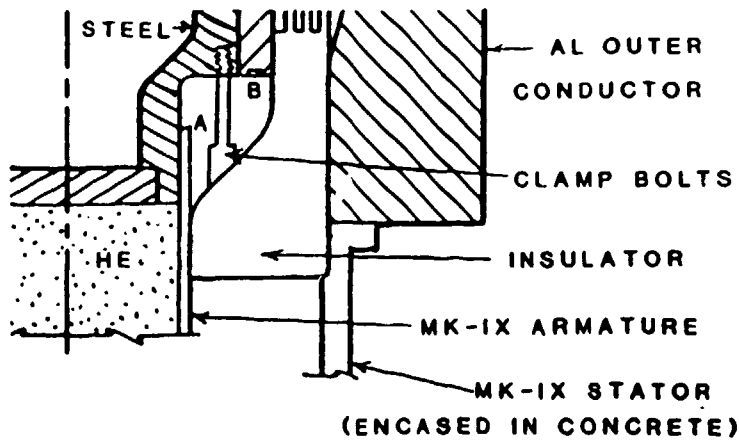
Magnified view of MK-IX output. Copper armature is brazed to copper flange at (A). Flange expands to larger radius and clamp bolts develop full strength of flange at the joint (B).
